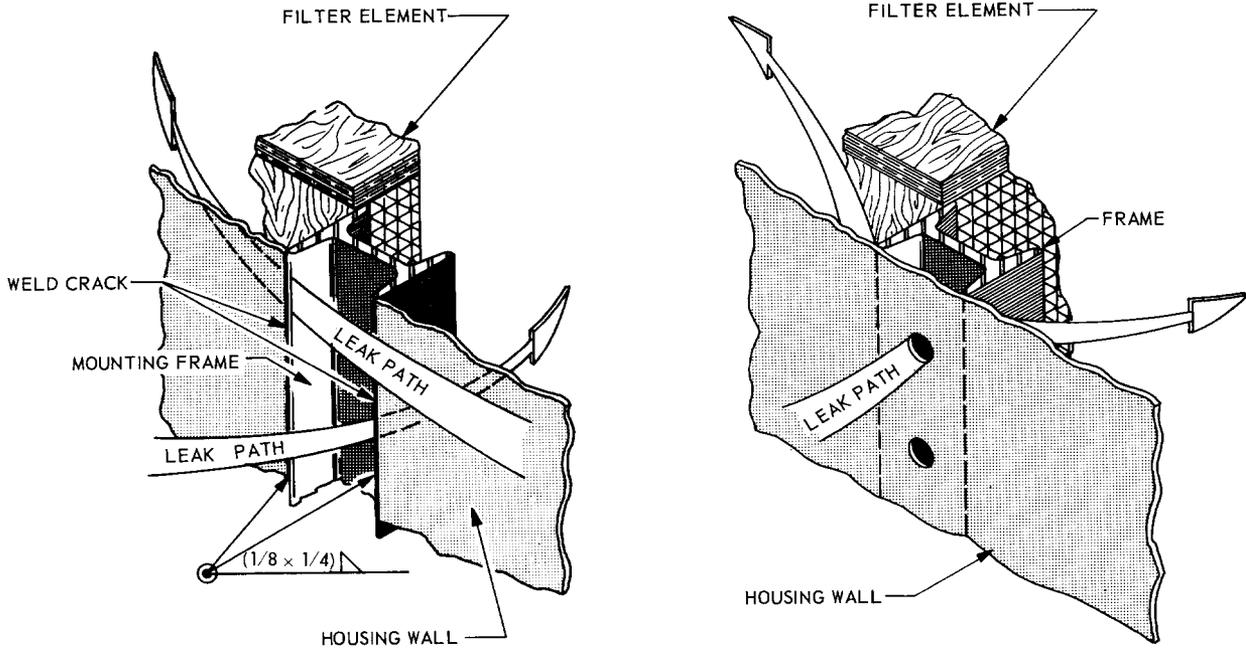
Methods of welding frame to housing to ensure that weld cracks result in inleakage instead of outleakage. In both installation methods, both legs of the I beam are seal welded to the housing. Because pressure inside the housing, both upstream and downstream of the filters, is below atmospheric, a crack in either seal weld will result in inleakage to, rather than outleakage from, the housing.
